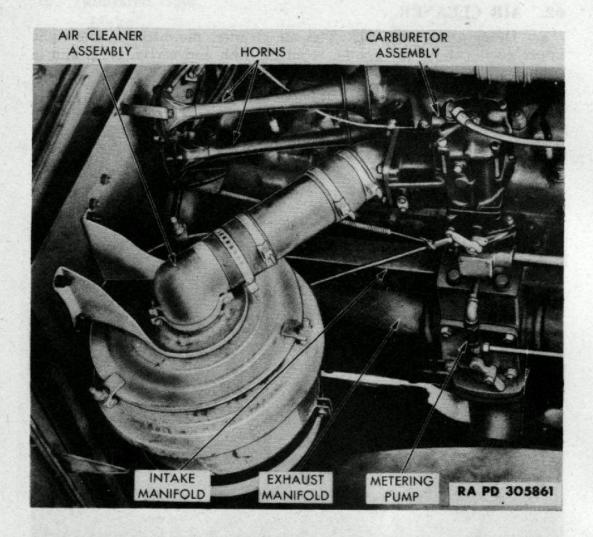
Air Cleaner and Carburetor Assemblies Installed
